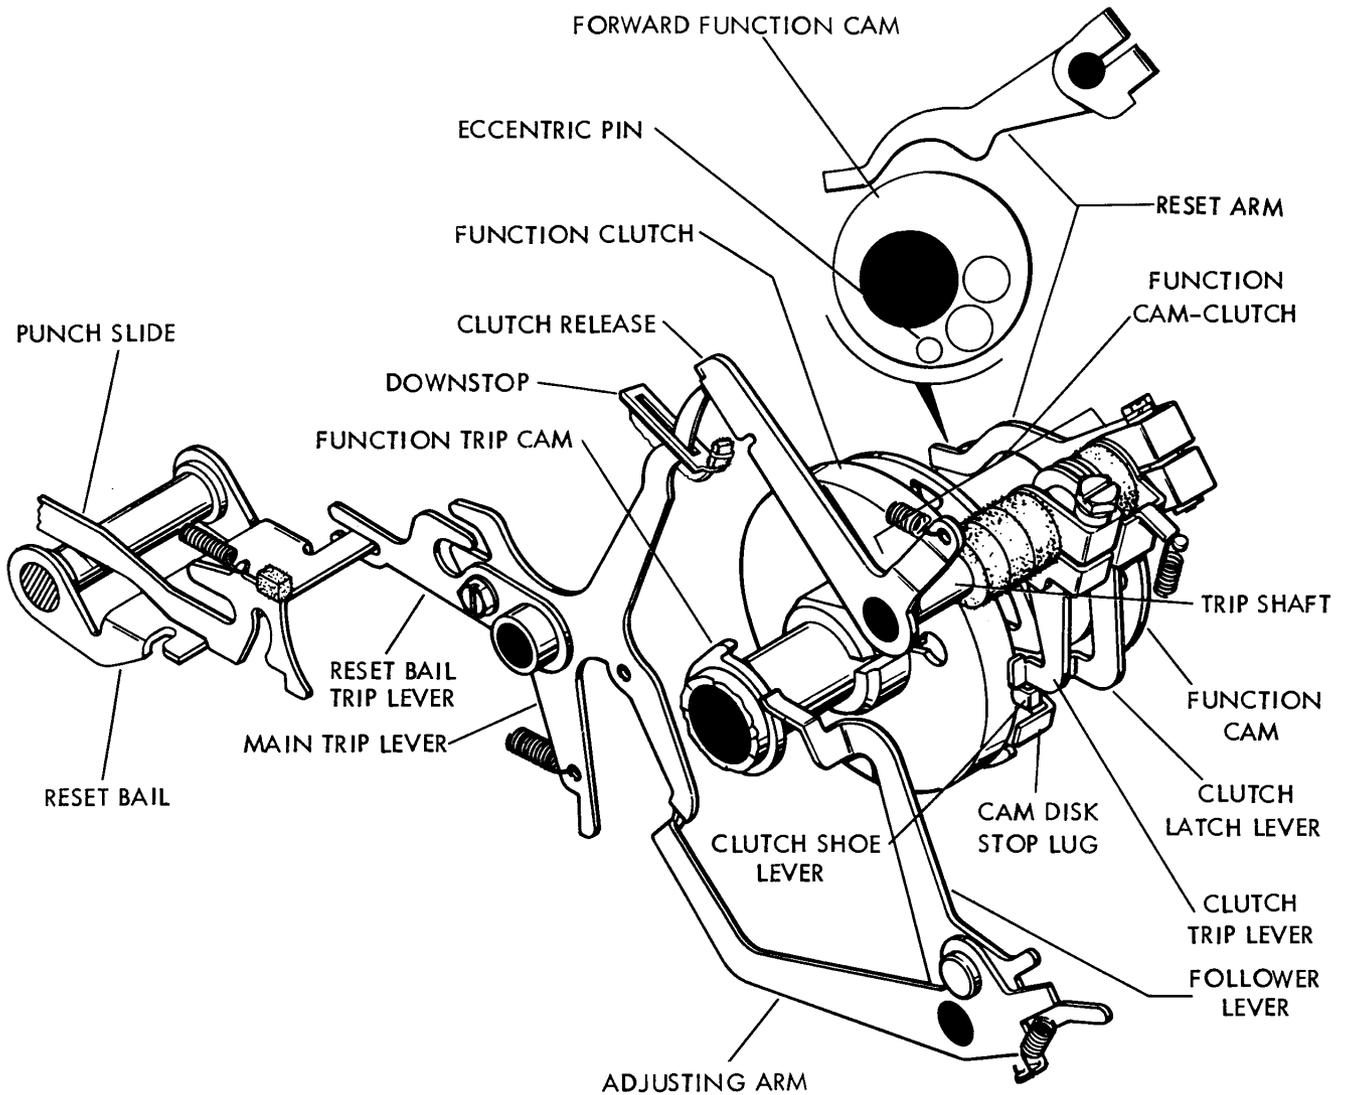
Function Cam-Clutch and Clutch Trip Assembly
